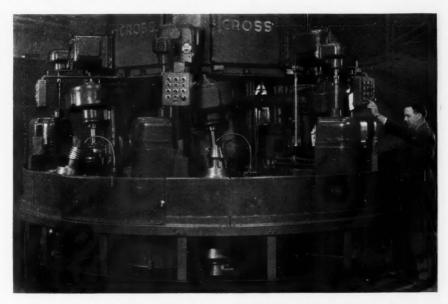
Cross Six-Station Thread Miller being used to mill taper threads on cress rollers for oil well drills. The table rotates while the cutters are in operation.
